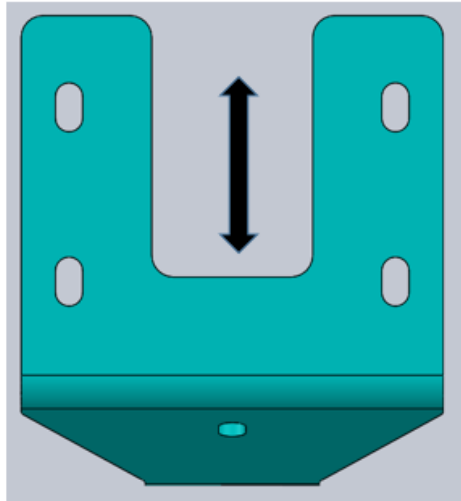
Top view of Front Bracket highlighting assembly allowance.
